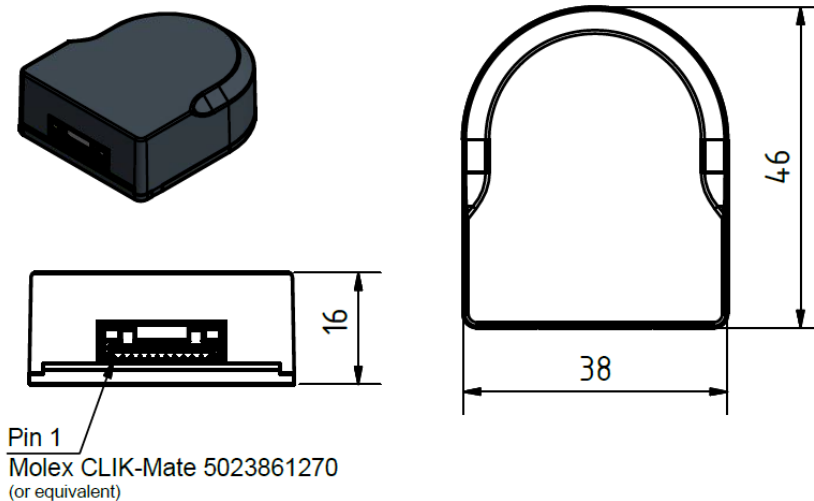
INME2-xxx-xxx-xx-C (with closed cover), all dimensions in mm.
